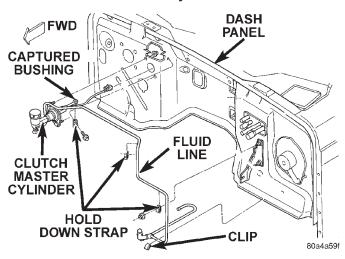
Right Hand Drive Clutch Master Cylinder INSTALLATION
